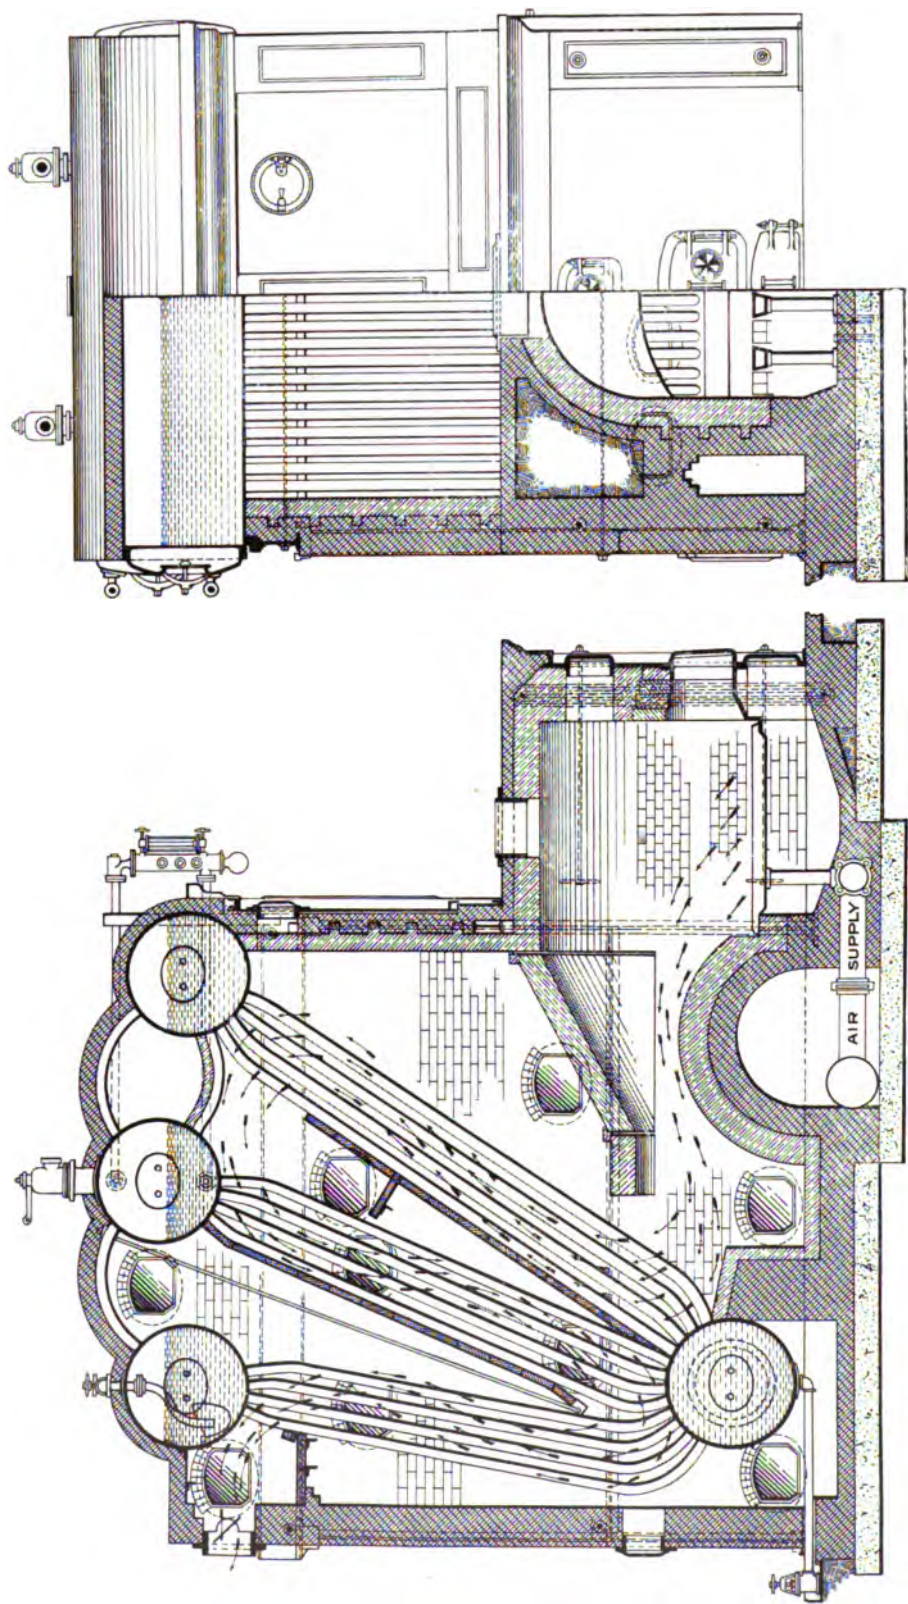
SECTIONAL SIDE AND FRONT ELEVATION OF STIRLING BOILER AND BAGASSE FURNACE
